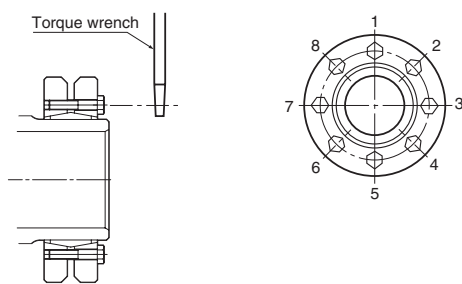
Mounting      Figure 2 Bolt tightening sequence
